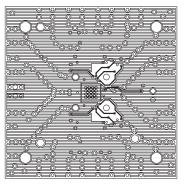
SKY73085-11 Evaluation Board Assembly Diagram
